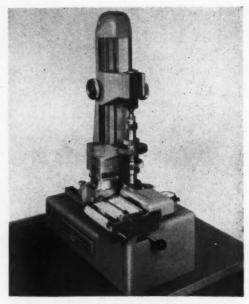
The Red Ring type GRJ rolling gear tester is here shown set up for checking one element of a cluster; gear
